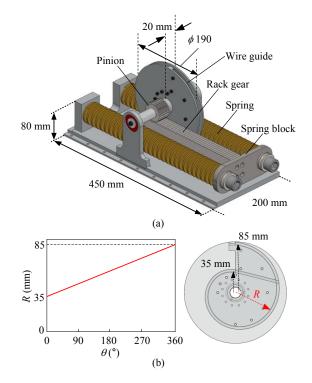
Design of proposed LGC: (a) total assembly, and (b) dimensions of the wire guide.
